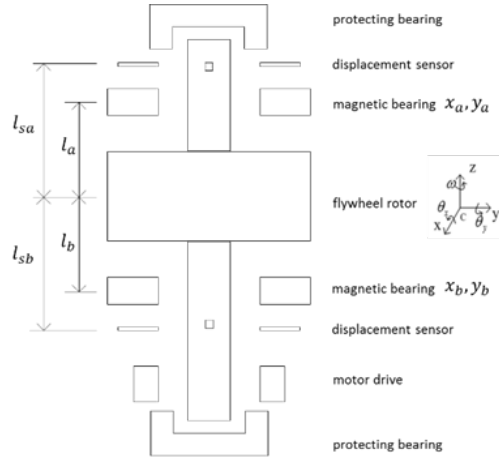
The model of rigid high-speed flywheel rotor system with AMBs
